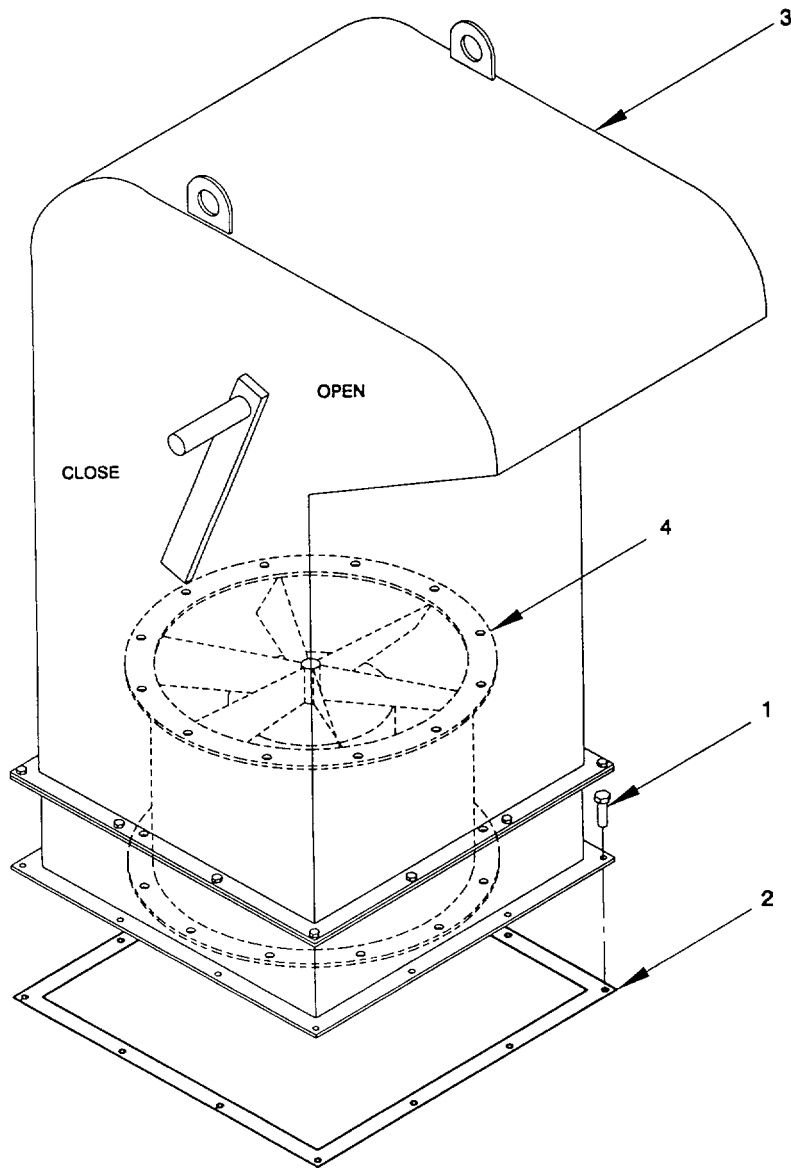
Exhaust Plenum Assembly, Remove/Install.
